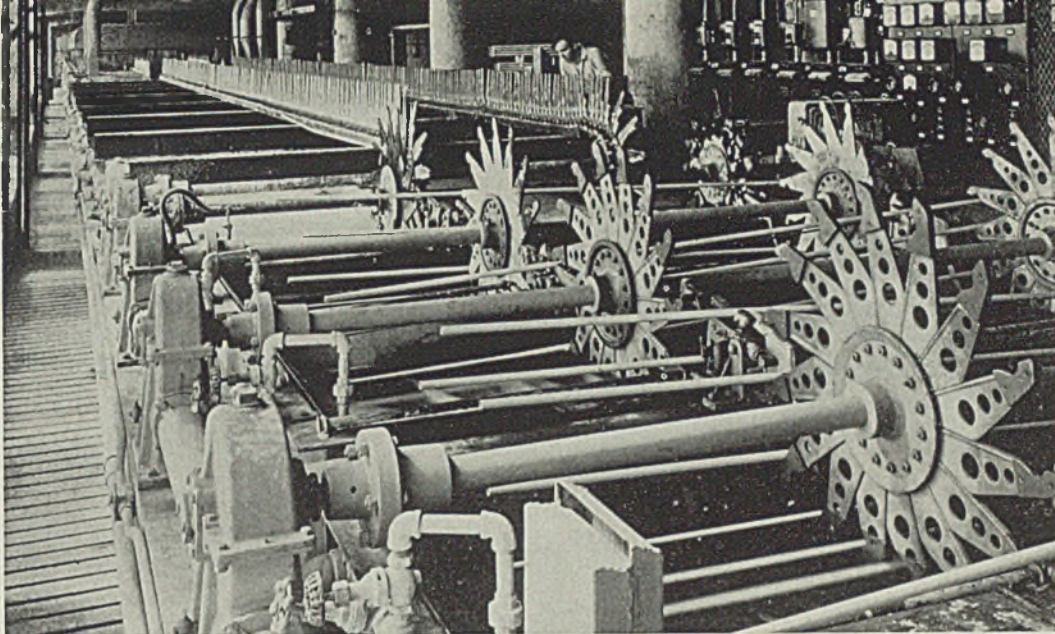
This shows portion of unusual conveying equipment used to transfer Electrunit Steeltubes conduit in new electrogalvanizing line at Brooklyn, N. Y., plant of Steel & Tubes Division of Republic Steel Corp.
